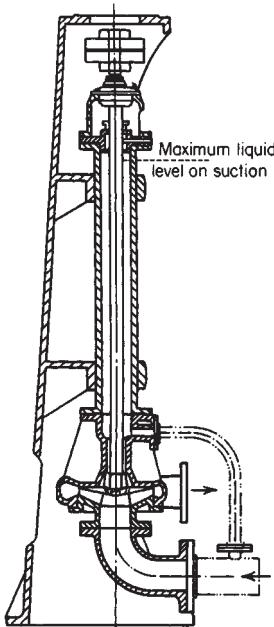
Vertical process pump for dry-pit mounting. (Courtesy of Lawrence Pumps, Inc.)
